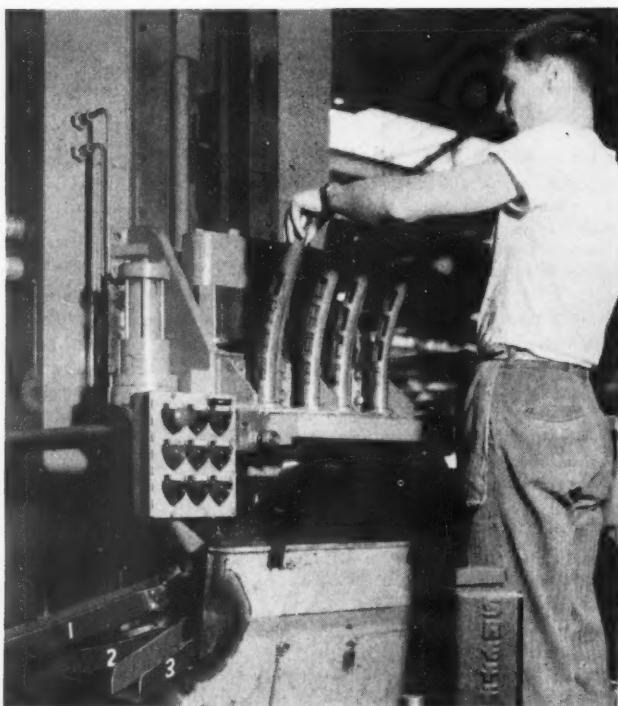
Shaft holes in steel pinions are broached in this American broaching machine, using a Spirex broach.
